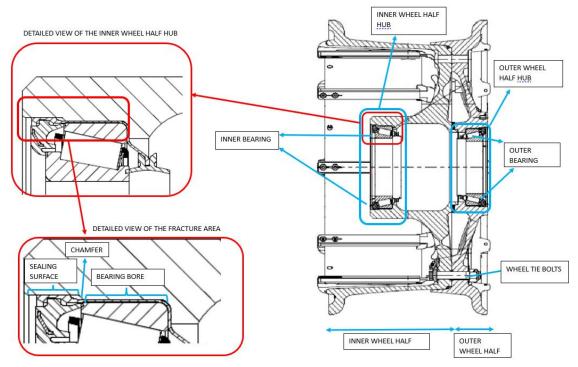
Sketch of the wheel showing the area in which the fracture originated.
